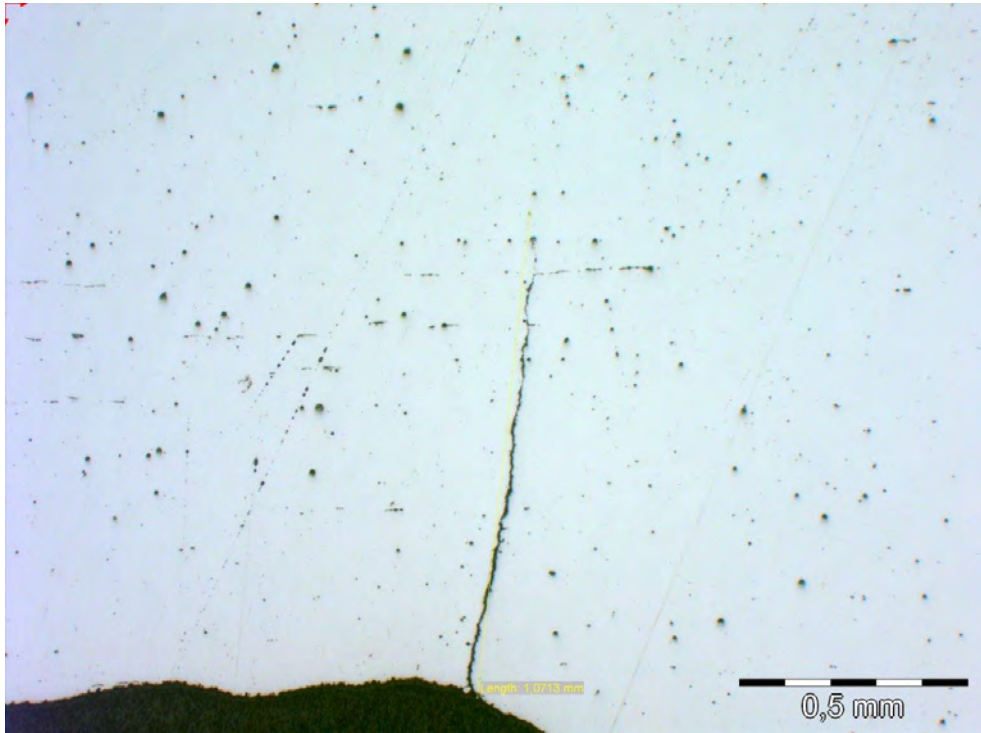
Cut one in crack at segment A, first ridge on barrel no. SFK 0120-A
